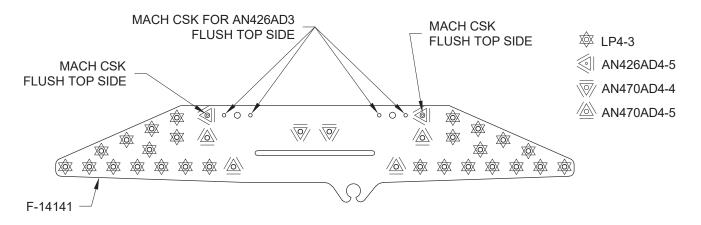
BAGGAGE FLOOR SPLICE (TOP VIEW LOOKING DOWN)
